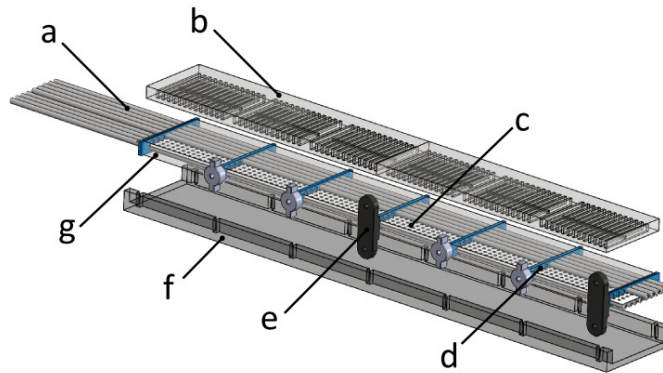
Fabrication process for a ribbed manipulator morphology: silicone tubing (a), elastomer pieces containing channels (b), constraint film (c), constraint supports (d), feet (e), constraint layer mold (f), and composite constraint layer (g). The figure is reproduced from Marchese et al. [2015].
